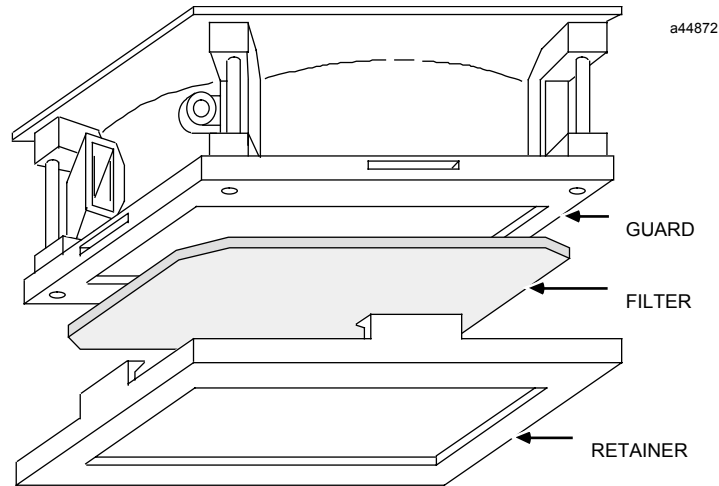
Filter Guard Assembly (AC Type Fan Shown)
